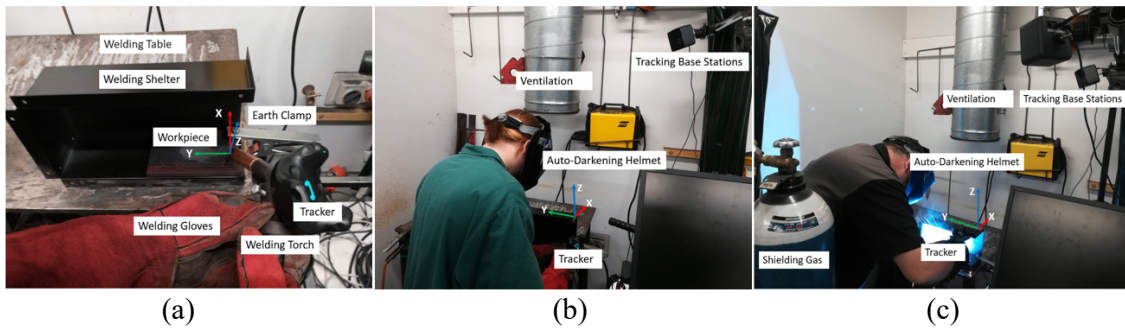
The hardware components of the GMAW motion tracking platform. (a) Welding motion-tracking platform, including welding shelter, welding torch, and the attached motion tracker; (b) an unskilled welder performing manual welding for motion data collection and analysis; (c) a professional welder performing on-site GMAW operation for expertise and skill extraction.
